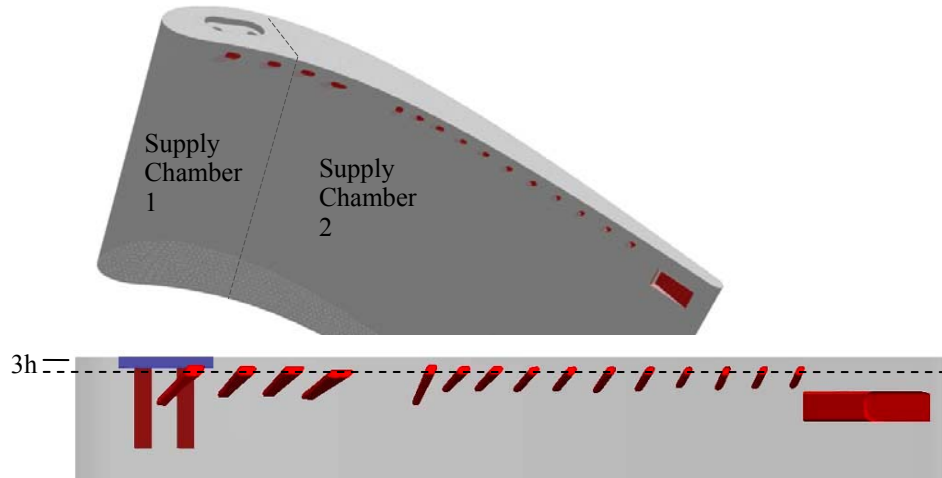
Schematics showing the hole geometry for the laser drilled holes
